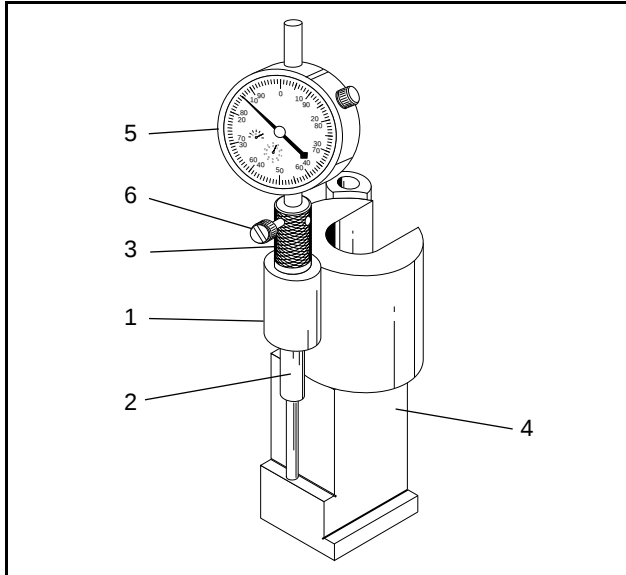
Adjustment Of Fuel Timing Tools (64.34 mm Fuel Setting), Alternate Method
